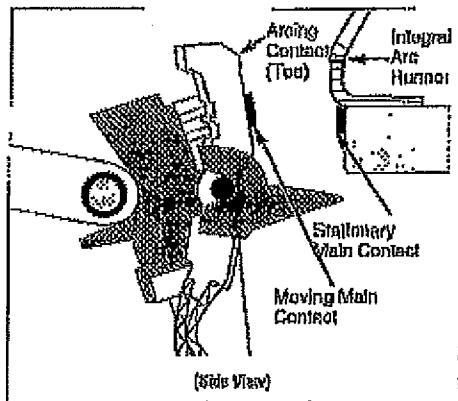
Contact Inspection Area with Circuit Breaker Open
